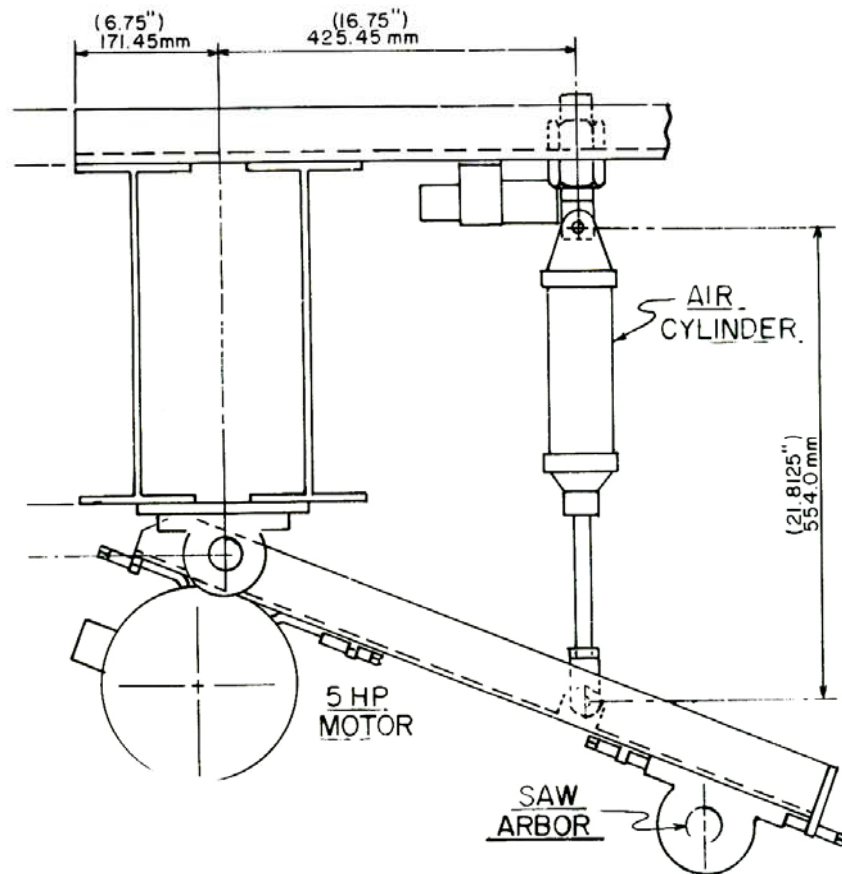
This schematic drawing shows the general arrangement of the trimming saw.
